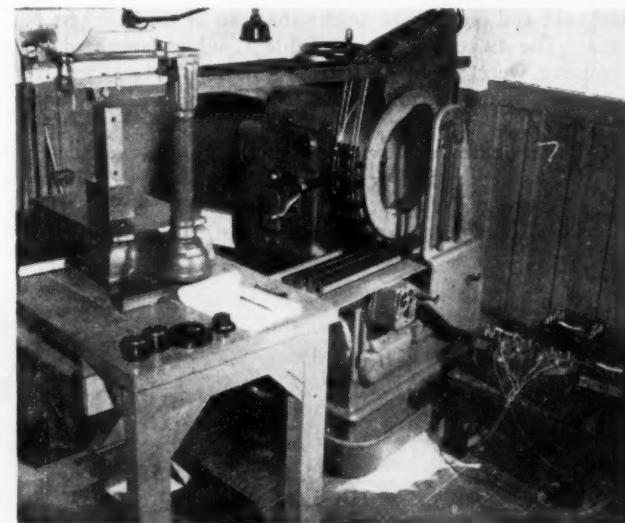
TAKING EFFICIENCY TEST ON ONE OF THE MACHINES USED FOR CUTTING TESTS
